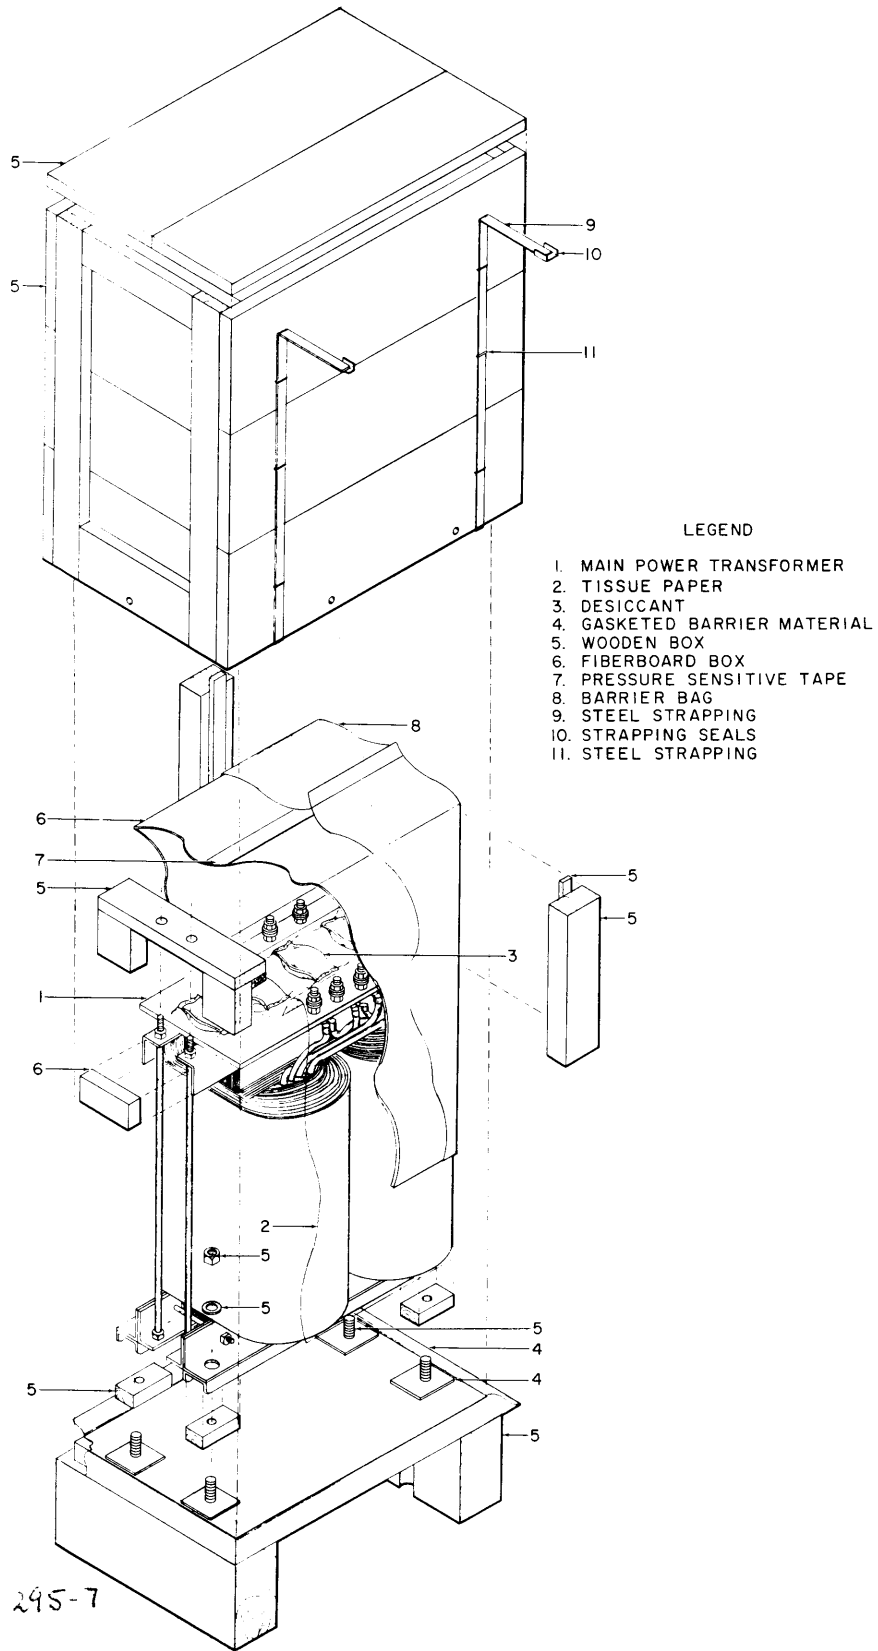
Typical Equipment Packaging (sheet 5 of 5)
